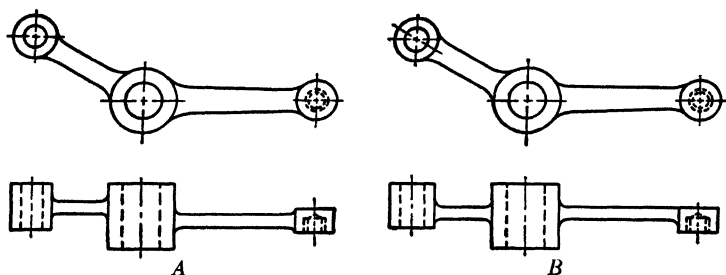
A. Casting designed with an irregular parting. B. Casting redesigned with a straight parting.
